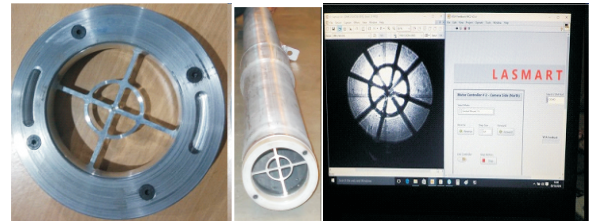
Fabricated pin hole mounted on the liner tube protection sleeve (LTPS) alignment jig and monitoring of the beam alignment using camera.
